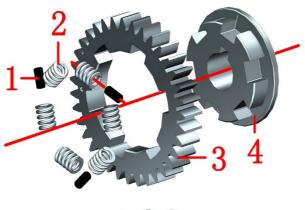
RIGHT CRANKCASE		ZT158MJ balance shaft assembly-2	CHK
